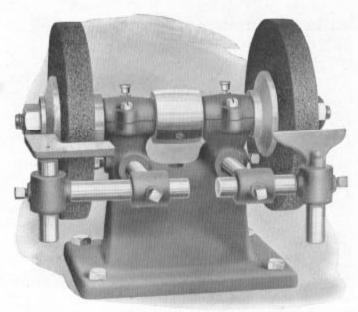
8-inch Bench Emery Grinder Completely Assembled and Ready for Use.
